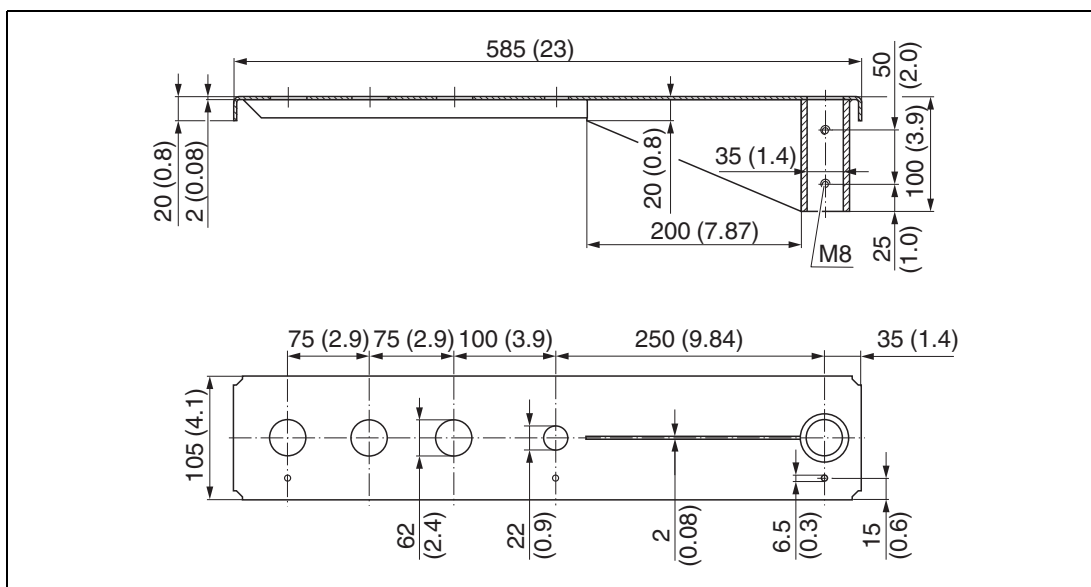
Dimensions of cantilever (short) with pivot for G2 sensor process connection on front, engineering unit: mm (inch)
